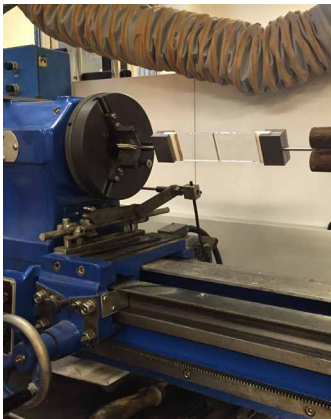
Lathe with custom jig for welding of straight joints
